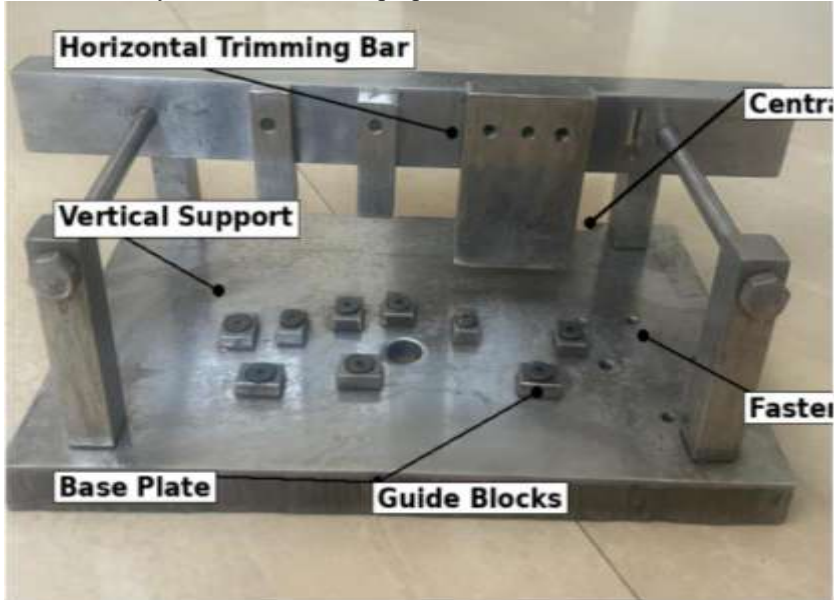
Innovative wax trimmer showing horizontal trimming bar, vertical supports, base plate and guide blocks.
